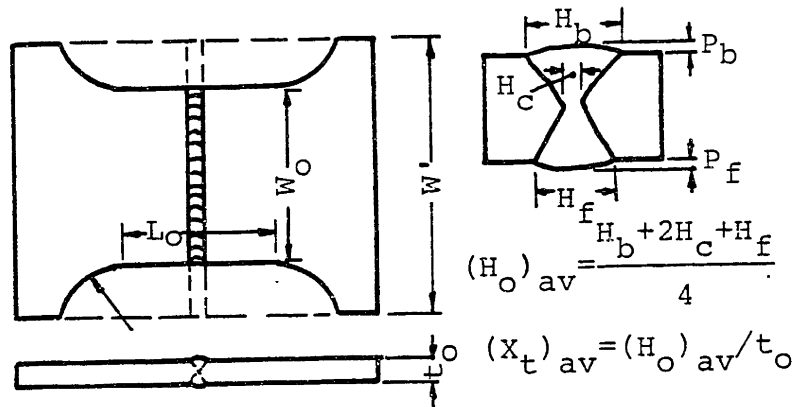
(b): Specimen design and dimensions for static tensile tests
